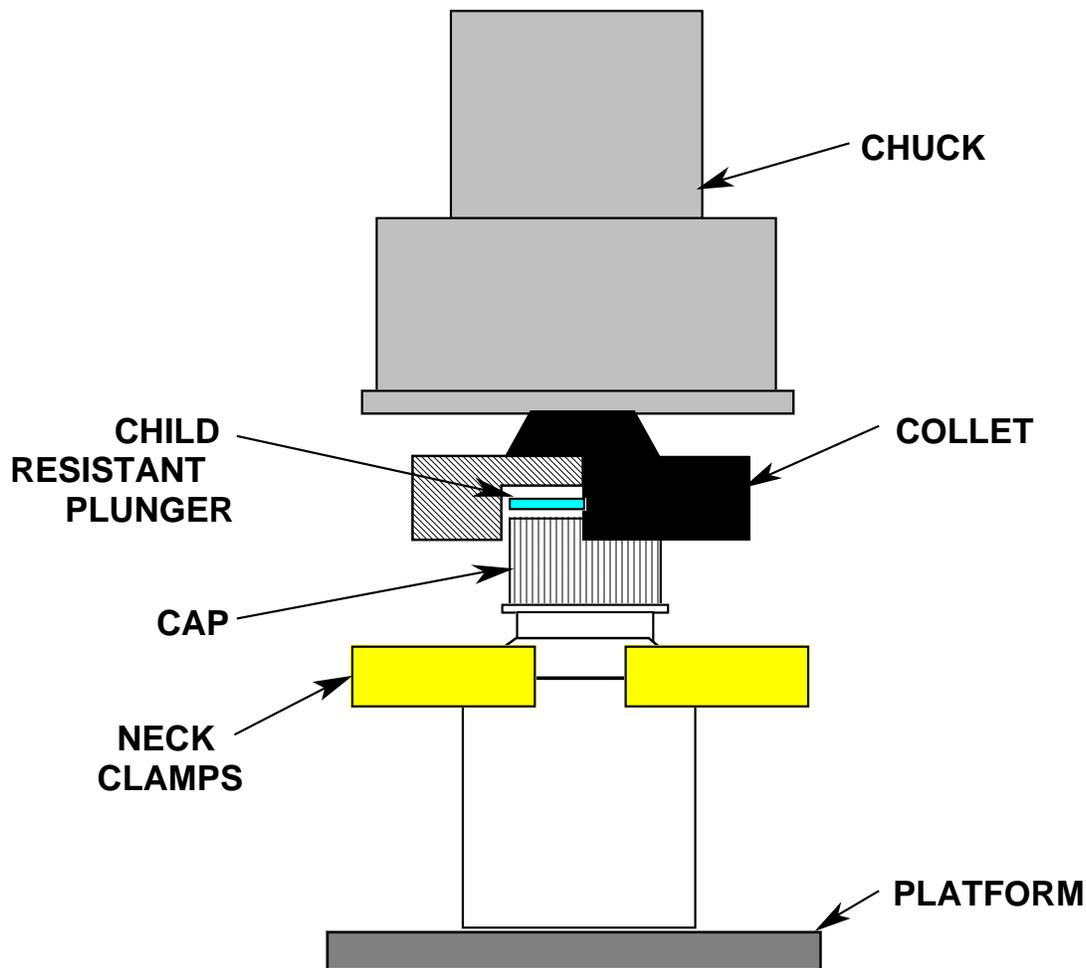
, ST-94 Torque Tester Mechanical Components (Chuck Assembly).
